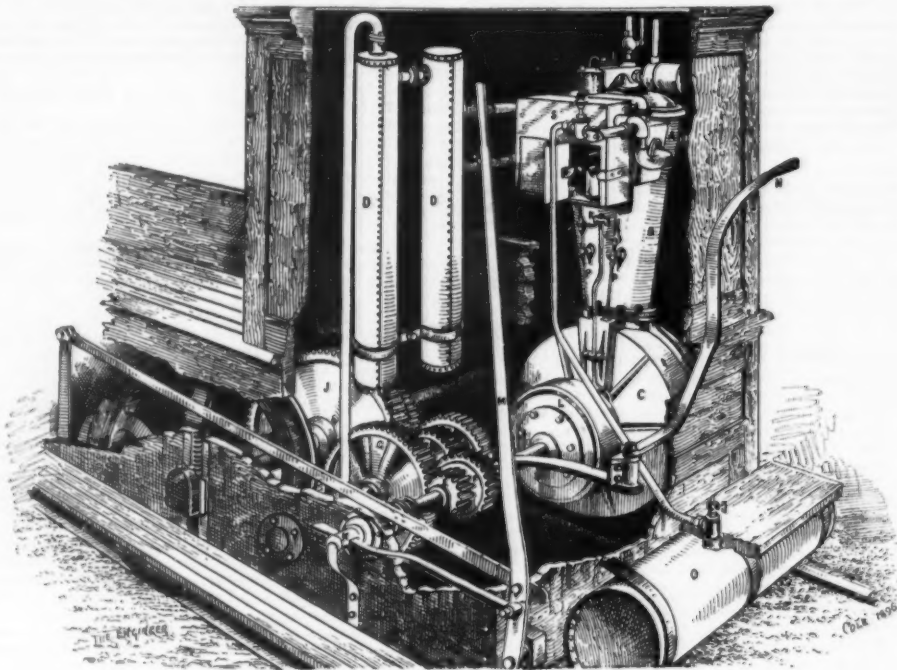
MOTOR AND GEARING—SELF-PROPELLED TRAMCAR.
